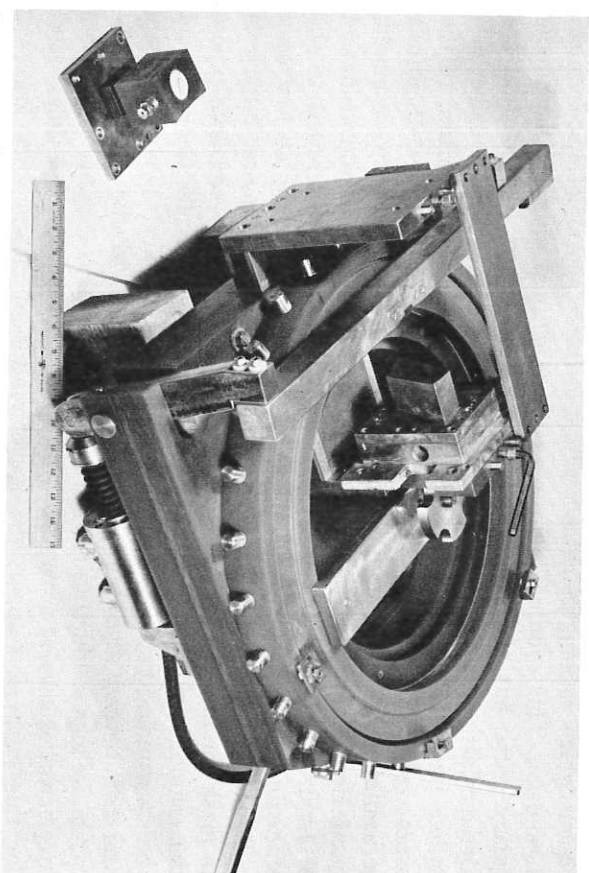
This fixture for electrochemically machining the inside of a jet engine casing illustrates the extensive use of reinforced plastic materials, while high load carrying parts and location surfaces are stainless steel. (Courtesy of the Anocut Engineering Company.)
